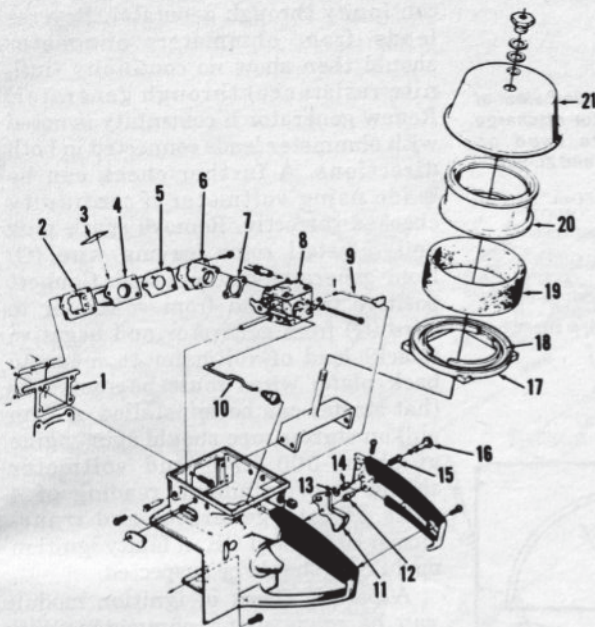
Exploded view of air box assembly used on model XL-98A.
